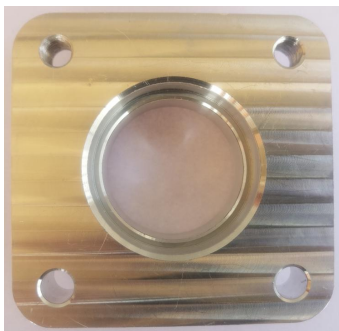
Physical drawing of the machined bearing pedestal - reverse side
